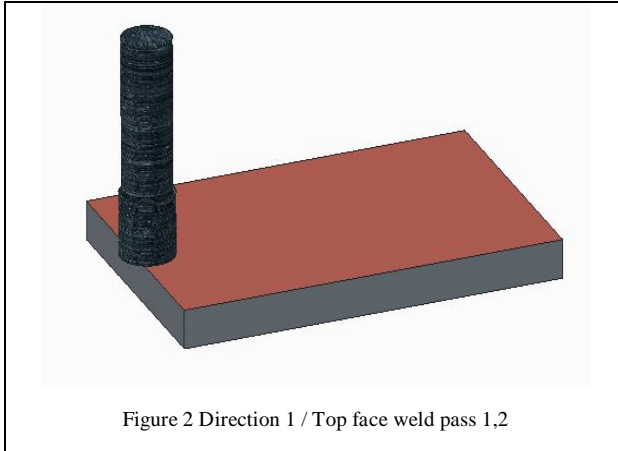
Direction 1 / Top face weld pass 1,2
